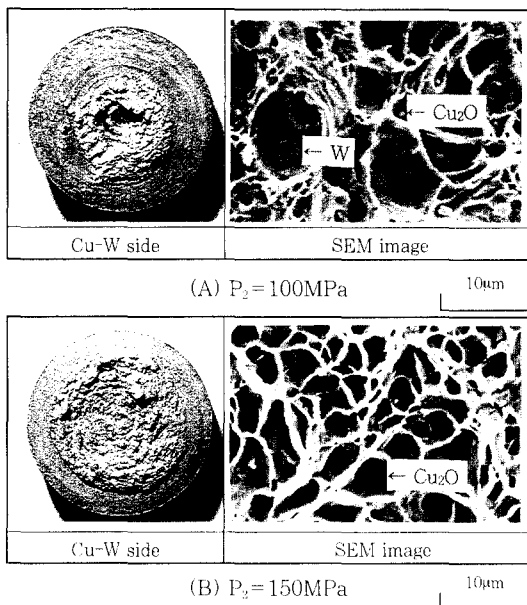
Tensile fracture surfaces($t_1 = 0.8\text{sec}$)
